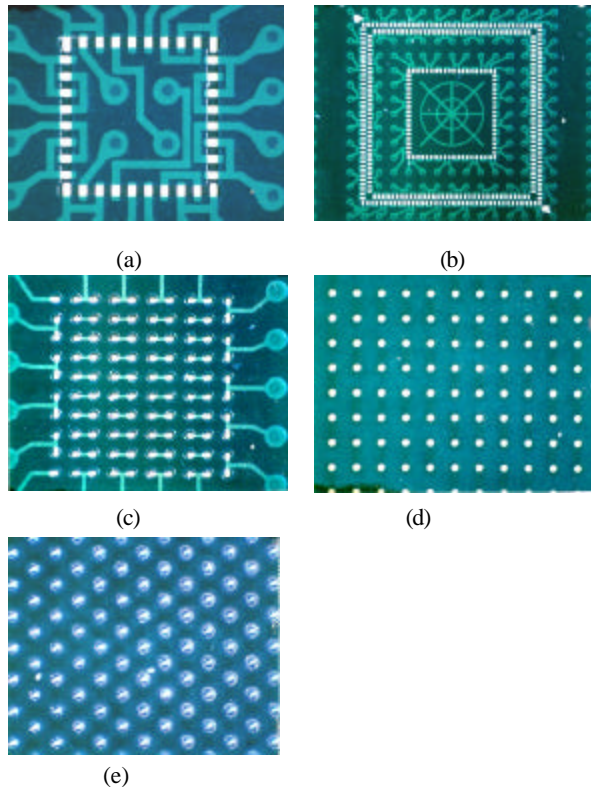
Substrate with various bond pad design (a) slot (b) Slot (3 row) (c) pad define (d) solder mask define (e) pre-solder
